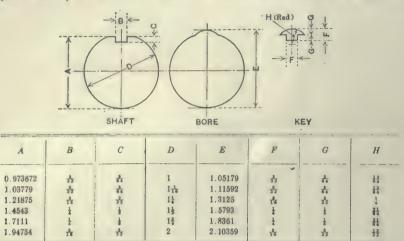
Shape and Dimensions of Keys Used for Milling Cutter Arbors.
